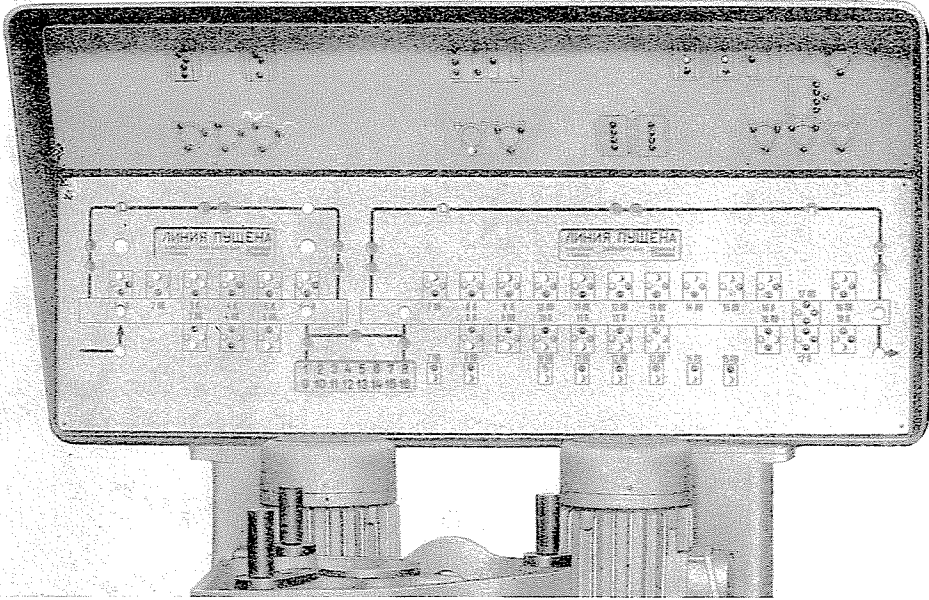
All principal movements on the transfer machine are indicated on the pilot-light panel
